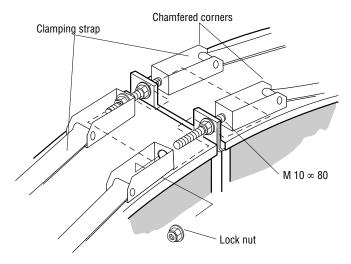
1. Fit the clamping straps. The chamfered corner must face outwards. Use the M10 x 80 mm long bolts, washers and locknuts supplied.
